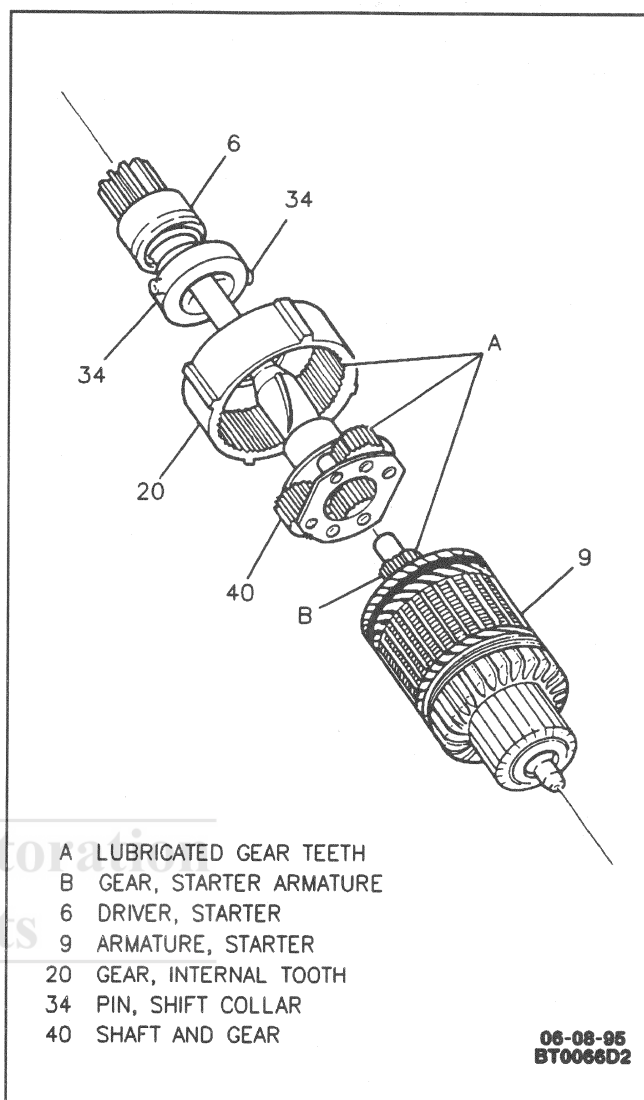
PG-250 Starter Armature and Drive Assembly.
